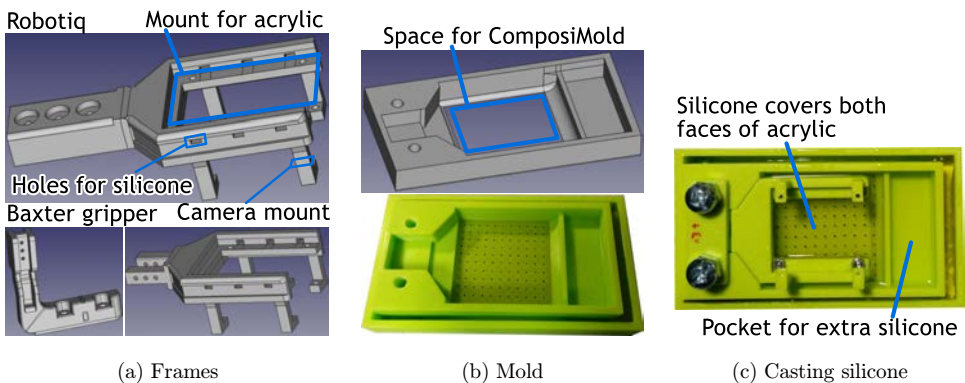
(a) CAD of frames for a Baxter electric parallel gripper and a Robotiq gripper. (b) Mold for silicone casting. (c) After pouring silicone into the mold.
